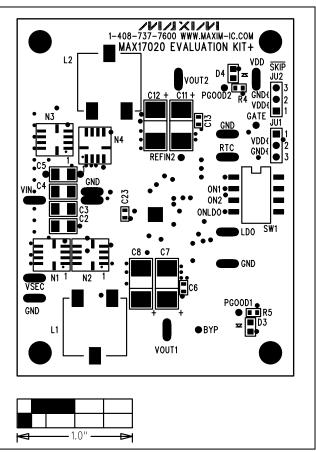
MAX17020 EV Kit Component Placement Guide—Component Side
